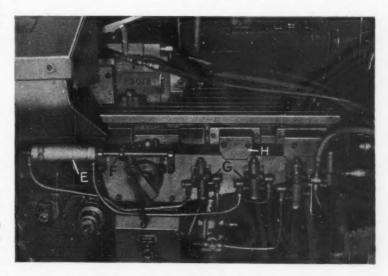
Side View of the Archdale Machine, with Guards Removed, Showing the Air-valves, Cam-plates, and Reversing Cylinder
